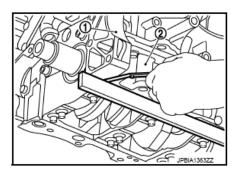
Checking Surface Height Difference Between Oil Pan Mounting Surface Parts (Upper)
